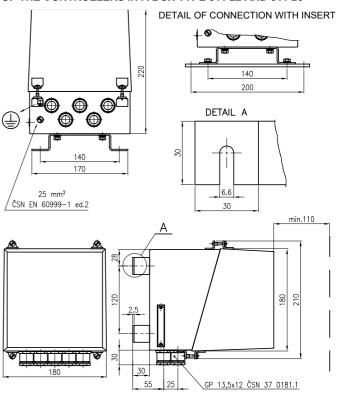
DIMENSIONAL DRAWING OF THE CONTROLLERS IN A BOX TYPE 511 22 AND 511 26
